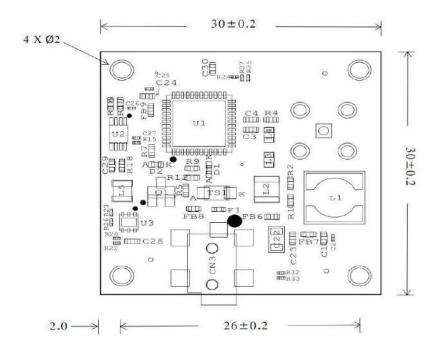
NileCAM20_CUNX Deserializer Board Front View
